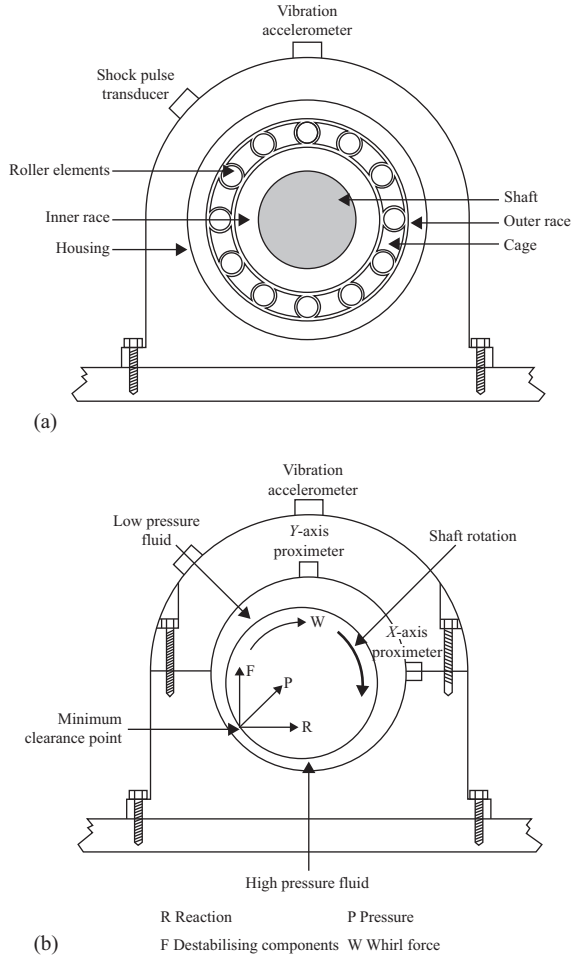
Bearing types and components: (a) rolling element bearing and (b) forces acting upon a shaft in a sleeve bearing. © 2017–2018 IET. Reprinted, with permission, from Reference [2]
